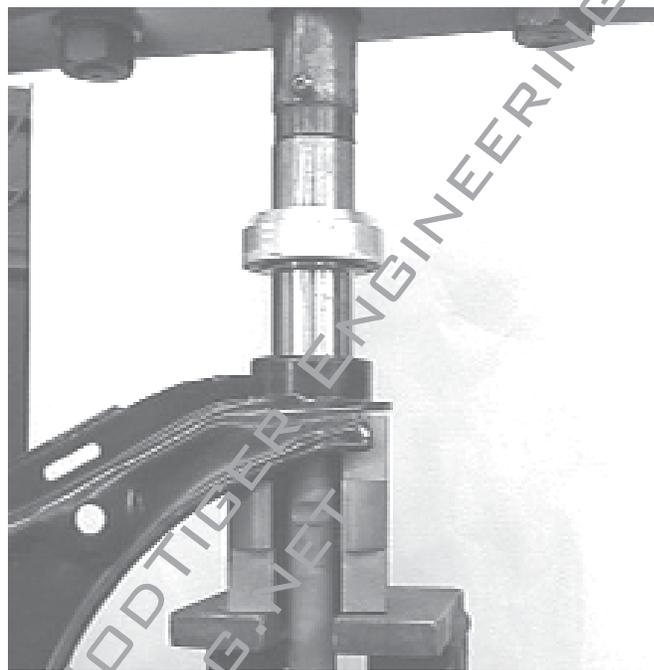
This is a picture of the proper press setup with tooling to maintain alignment and apply the assembly forces to the bushing shell and A-Arm without distortion. Measure the diameters before you press and choose your tolerances to avoid trying to press more than 0.005" interference. Remember to chamfer the bushing shell to allow an easier start for the bushing.
